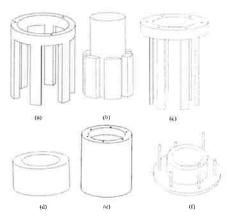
Die tools for compaction of stator core for claw pole machine.
